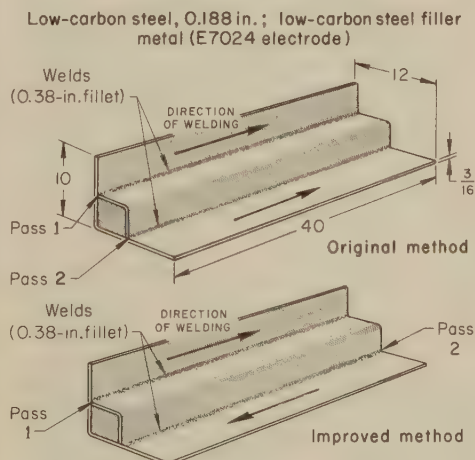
Weldment for which reversal of pass direction eliminated the need for clamping to keep distortion within acceptable limits (Example 3)
